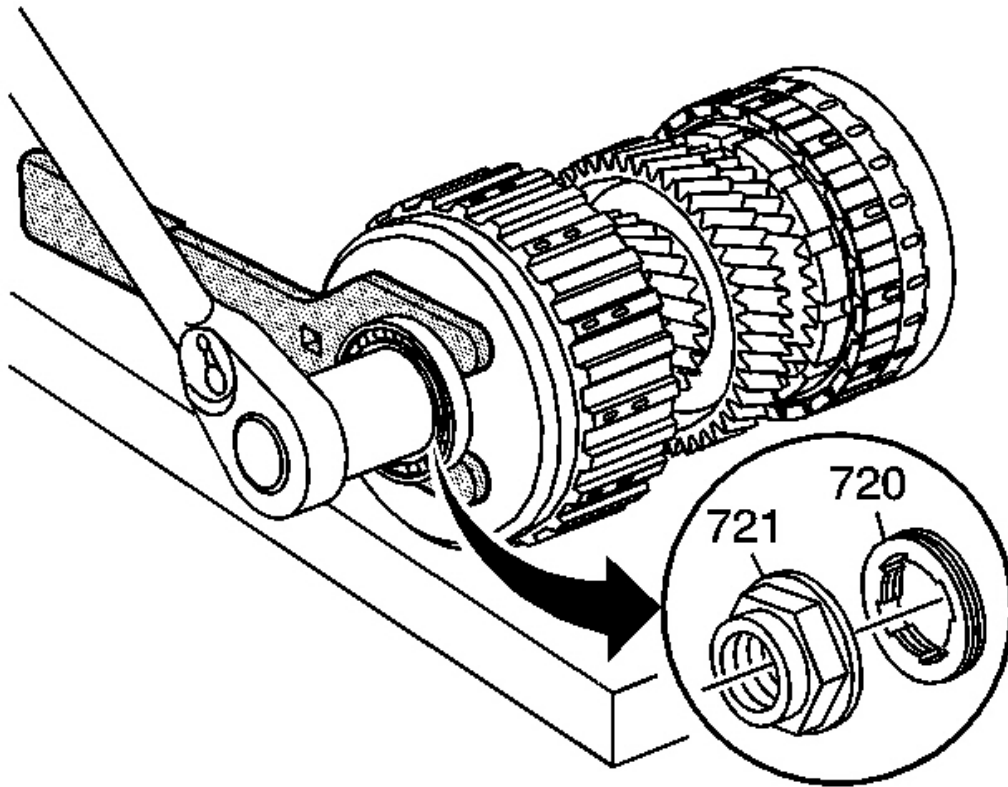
Removing The 1st/2nd Clutch Shaft Retainer Nut
